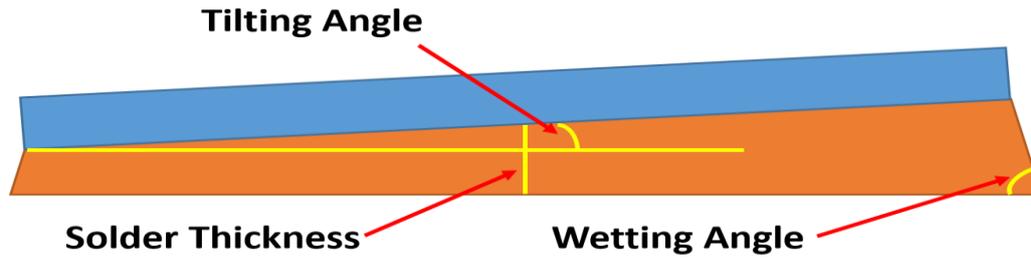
Schematic of wetting angle, tilting angle and solder thickness of the solder layer
